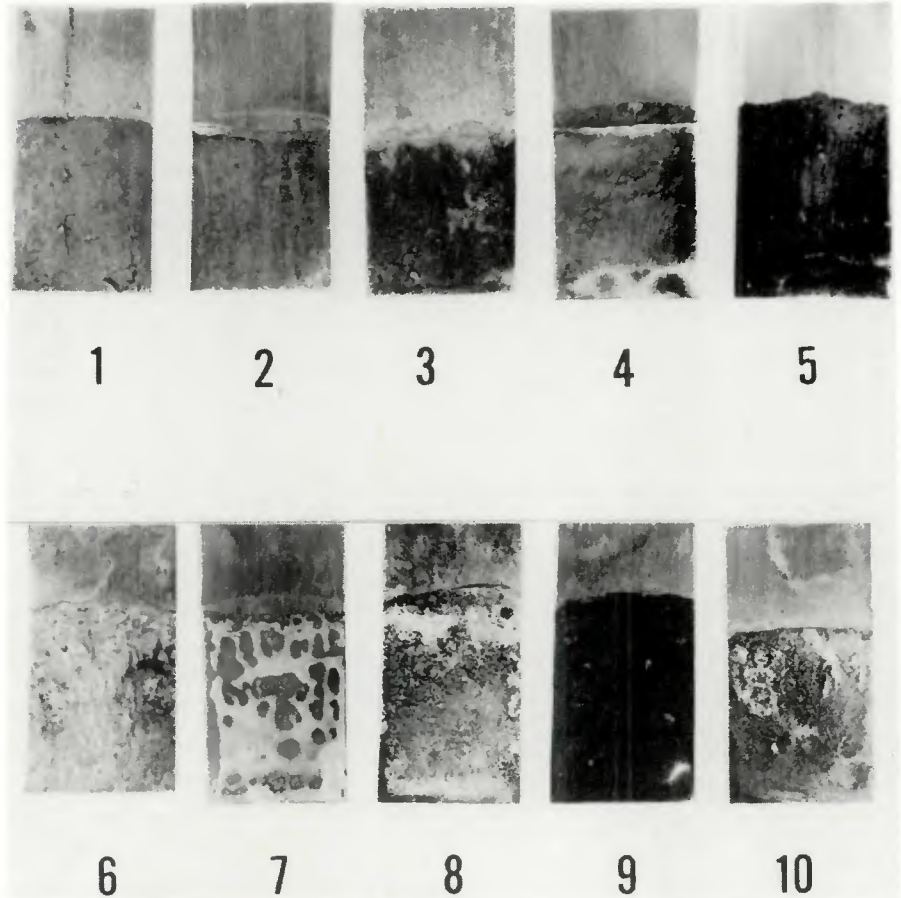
Wetting and appearance test specimens after immersion in solders from Table 1. X0.85, reduced 19%
